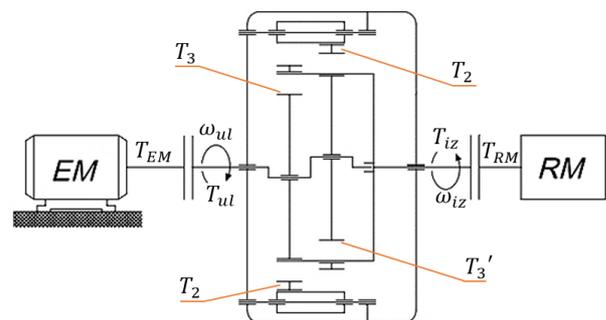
Kinematic diagram of cycloid speed reducer with electric motor (EM) and working machine (RM) [28]
